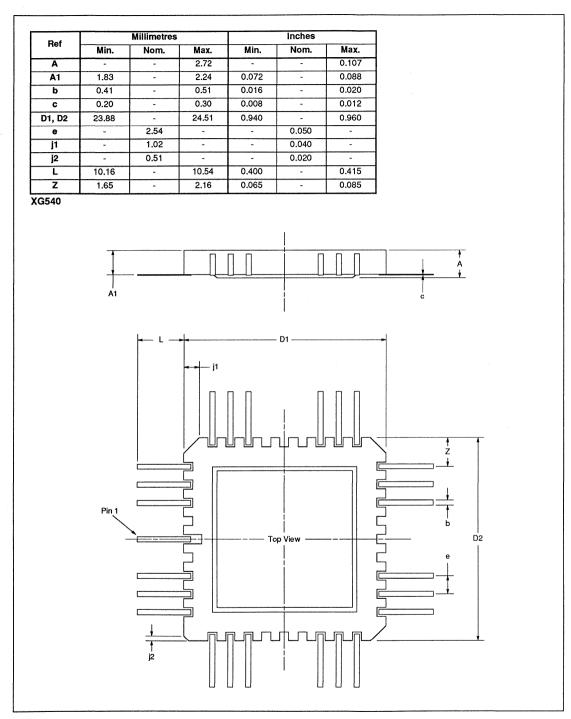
68-Lead Topbraze Flatpack - Package Style F
